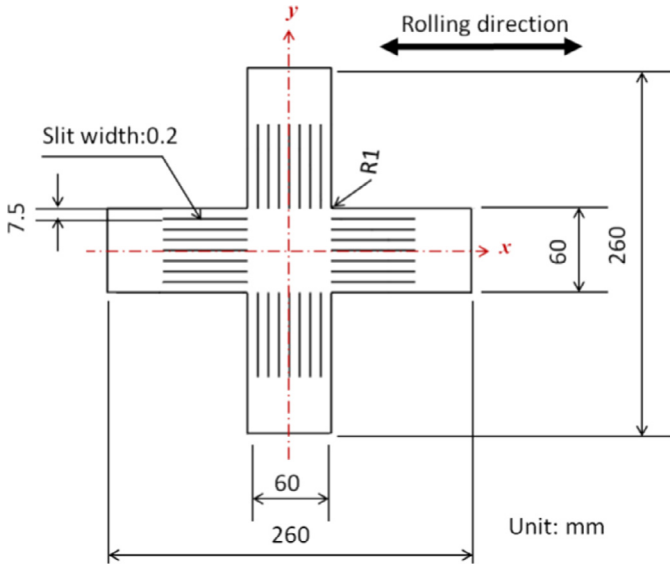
Dimensions and shape of the cruciform specimen (Kuwabara et al., 2000).
